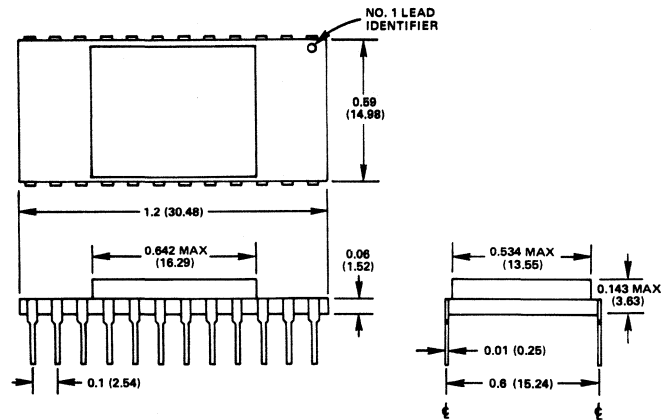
Outline Dimensions (Dimensions shown in inches and (mm))
